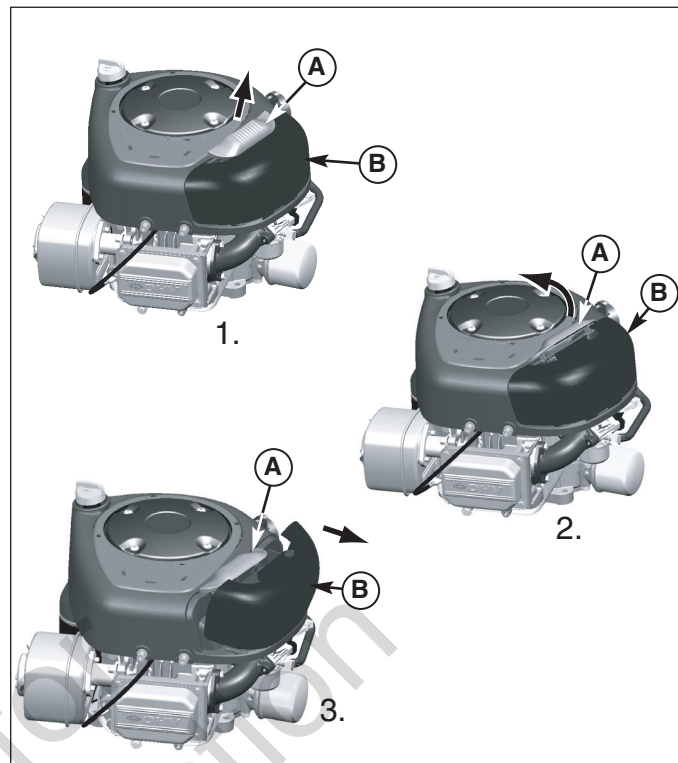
Air Filter Assembly - Briggs & Stratton Single Cylinder Models
